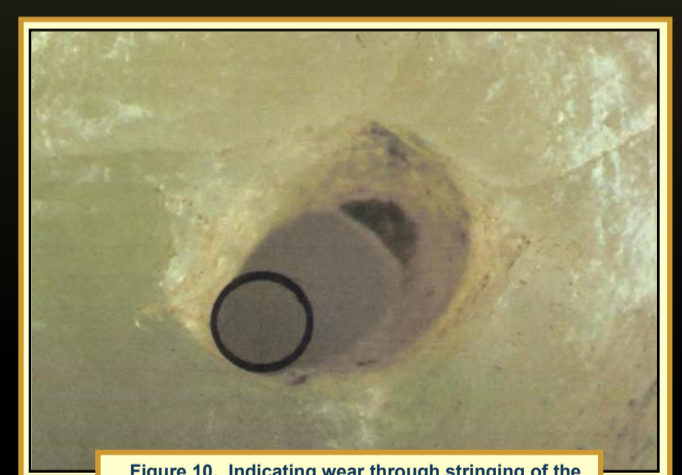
Indicating wear through stringing of the original hole drilled (black circle)
